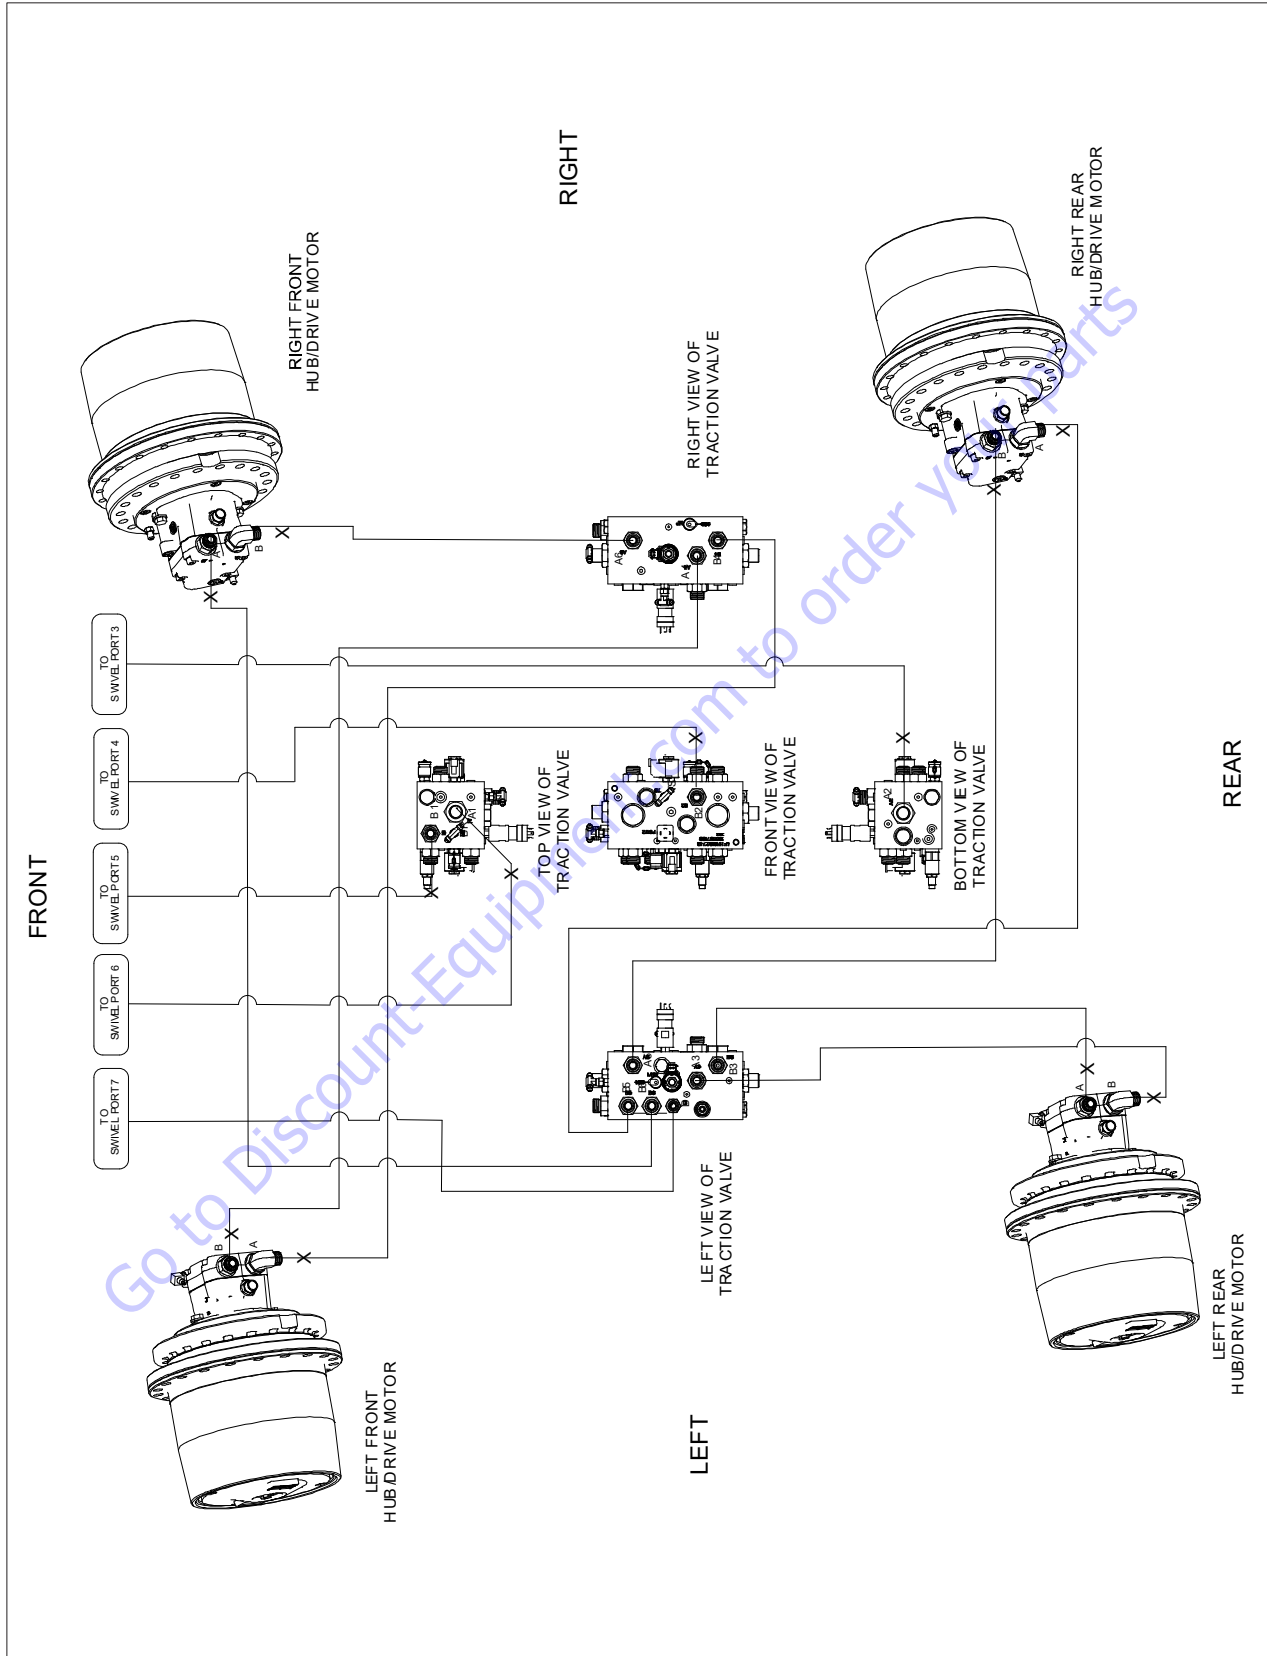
Drive System Hydraulic Circuit - Sheet 1 of 2
